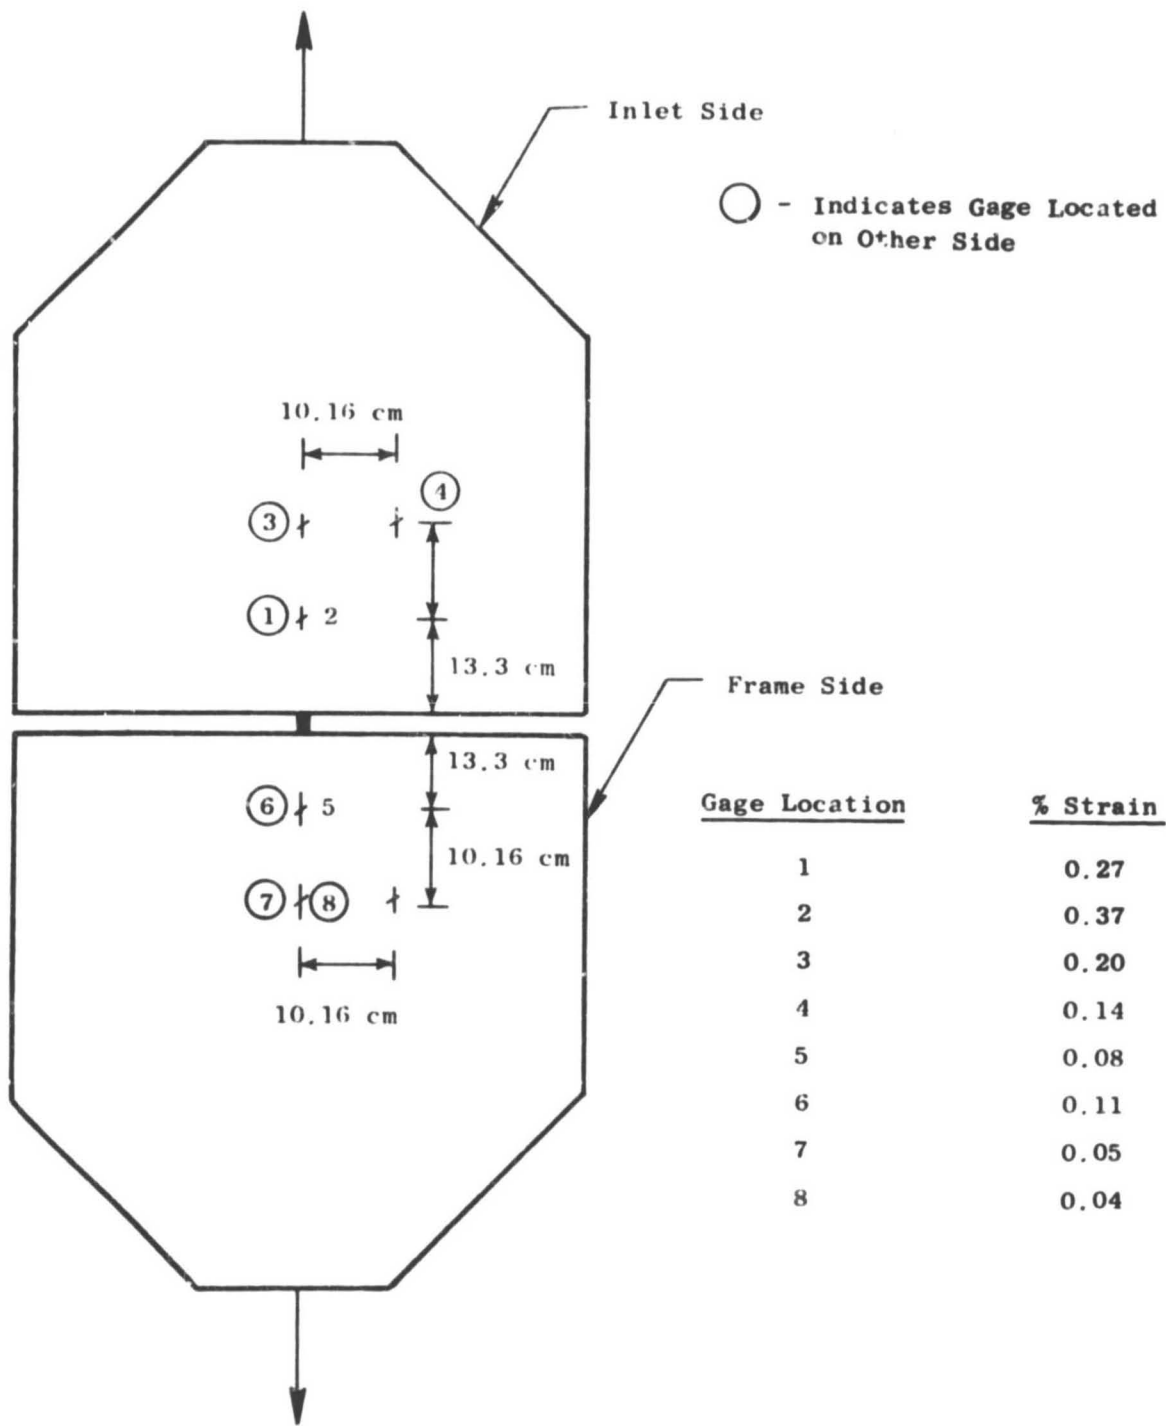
Inlet-to-Frame Test Specimen Gage Location and Strains.
